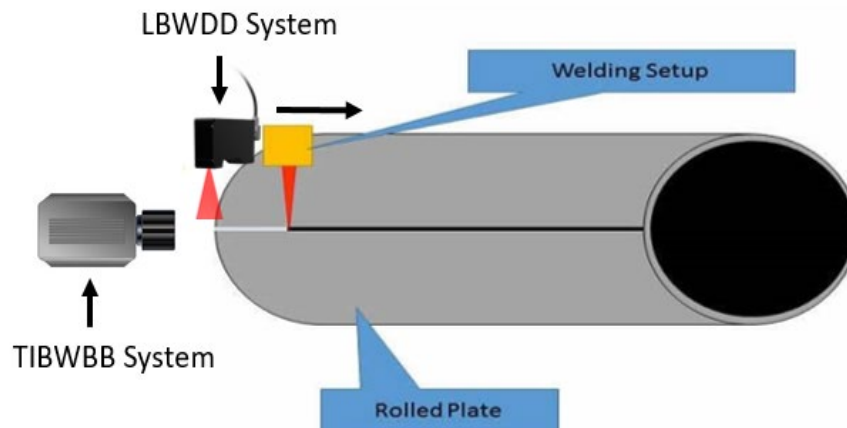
LBWDD System in single seam continuous pipe laser welding.
